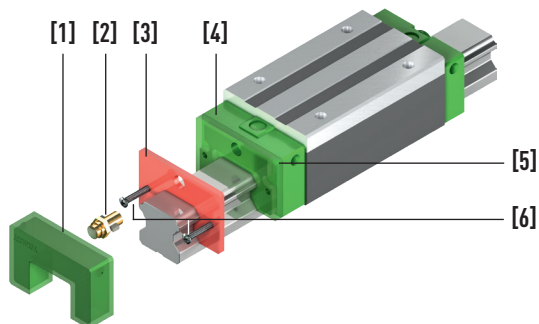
Exploded view of self-lubricating E2 block for the HG, EG and RG series
